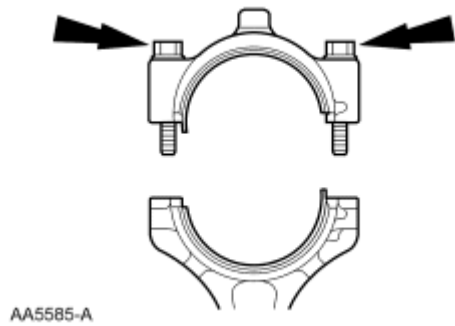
Positioning Bearing, Rod Cap & Bolts
